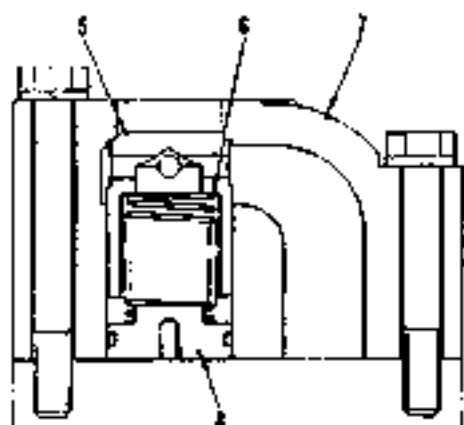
Make-up valve (blade cylinder) Fig. 2-52 Make-up valve (Ripper cylinder)
